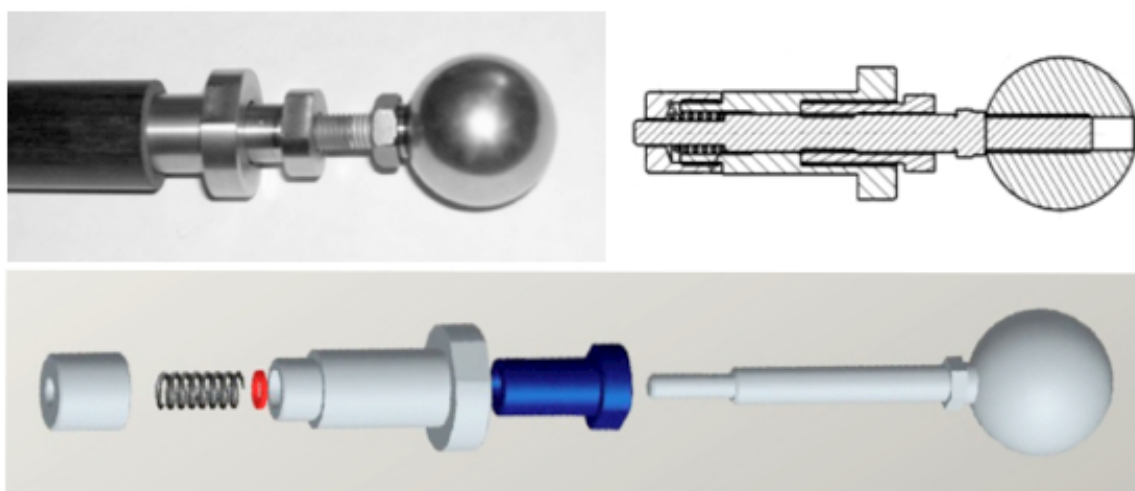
Here you see the ball end of each carbon fiber leg. The blue part highlighted in the bottom drawing is the locking collar. The aluminum piece closest to the carbon fiber is threaded, and is epoxied into the carbon fiber tube. When the carbon fiber tube is twisted, the assembly rotates around the threaded rod soldered into the ball.
